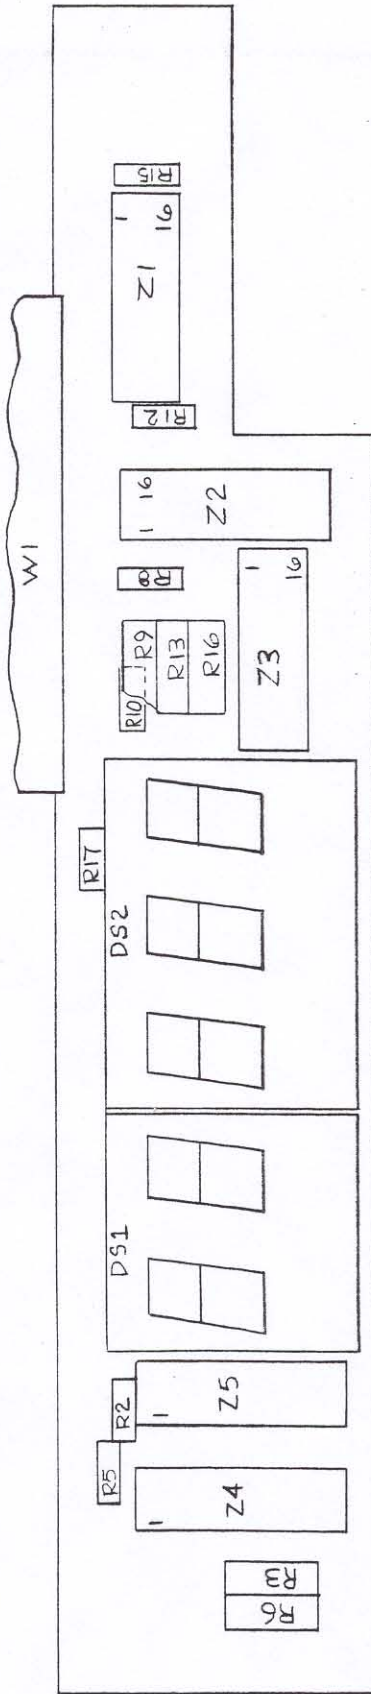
Display Board (Standard and Degrees & Minutes Option), Parts Locator
